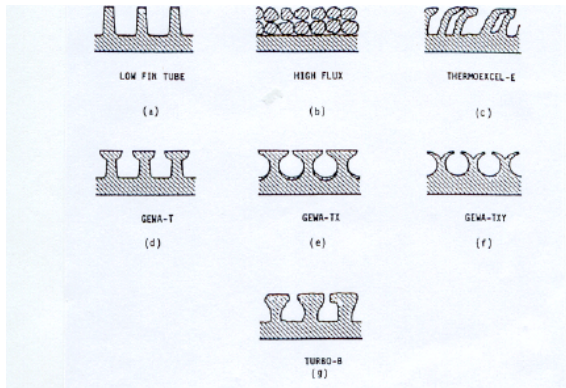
Examples of structured boiling surfaces (Pate et al.,1990).
